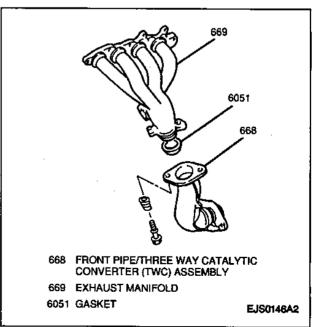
Front Pipe/Three Way Catalytic Converter (TWC) Assembly at Exhaust Manifold
